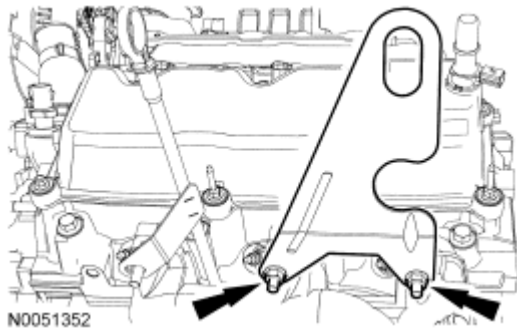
Locating Nuts & LH Engine Lifting Eye
